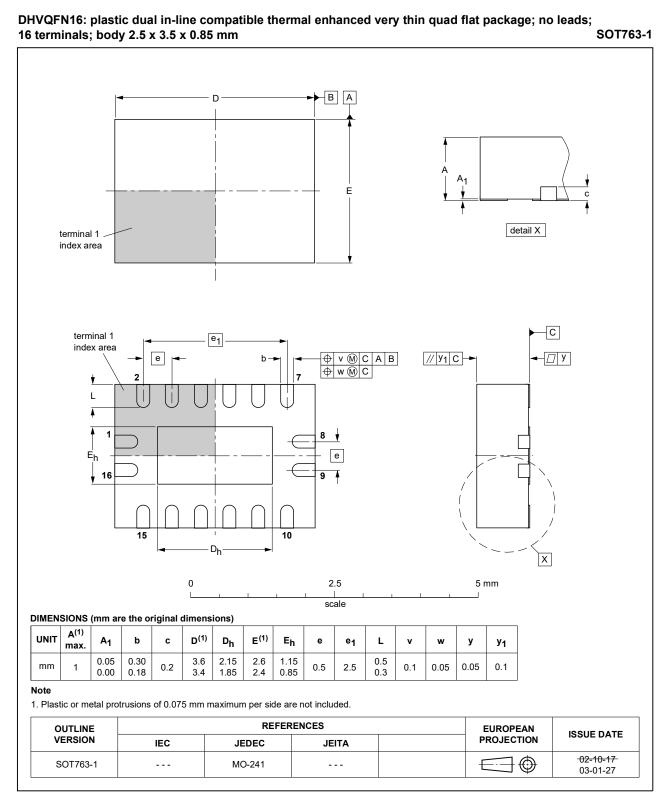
Package outline SOT763-1 (DHVQFN16)
